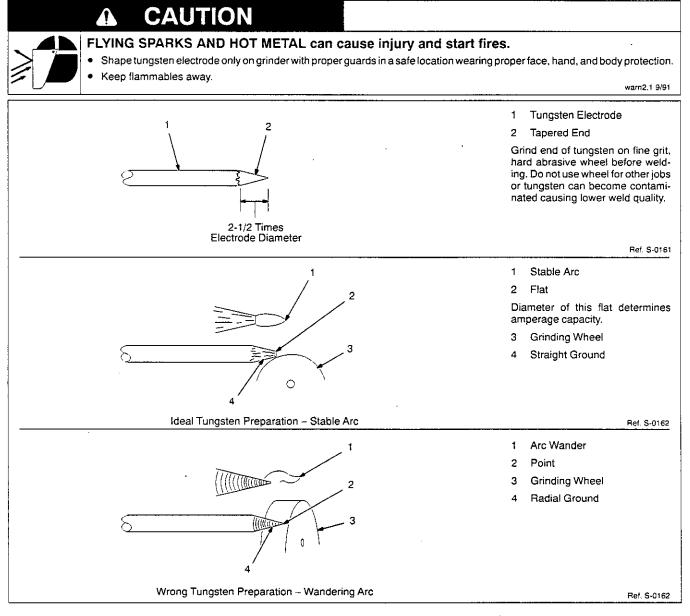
Preparing Tungsten For DC Electrode Negative (DCEN) Welding
